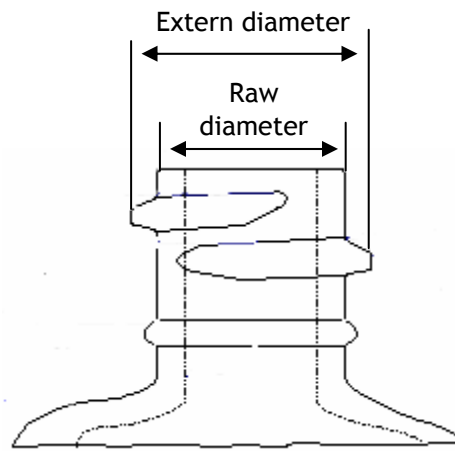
Schema of a bottle neck with its dimensions [6]
